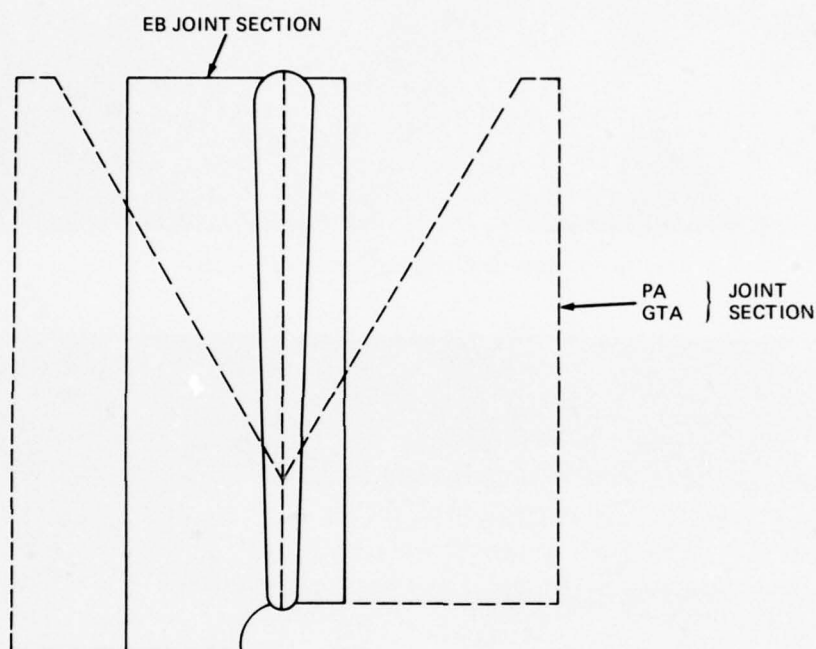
Schematic Comparison of EBW Straight Butt Joint with V-Groove Joint Necessary for Arc Welding
